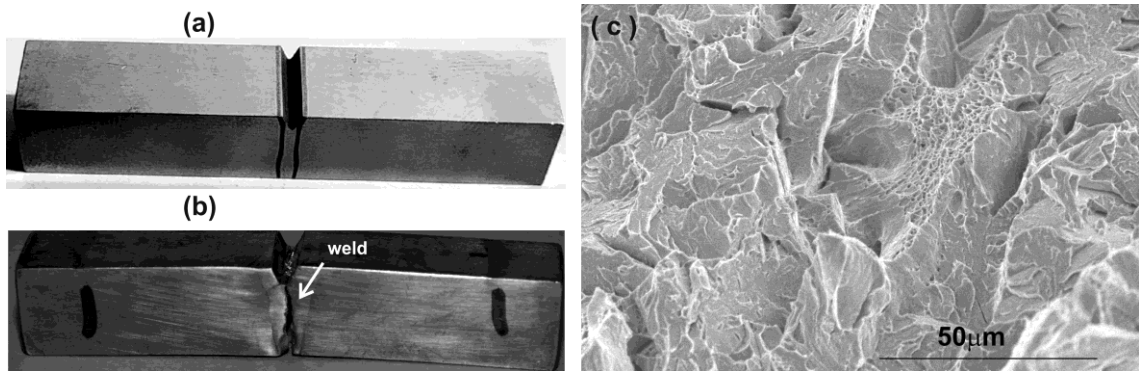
(a) Photograph of Charpy V-notch impact sample showing the location of notch (b) Impact tested fracture sample of as-welded joint showing the crack path and (c) fractograph of as-welded sample in figure (b) revealing quasi-cleavage fracture.
